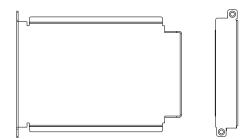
RUGGEDCOM RX1500PN LM Blank
